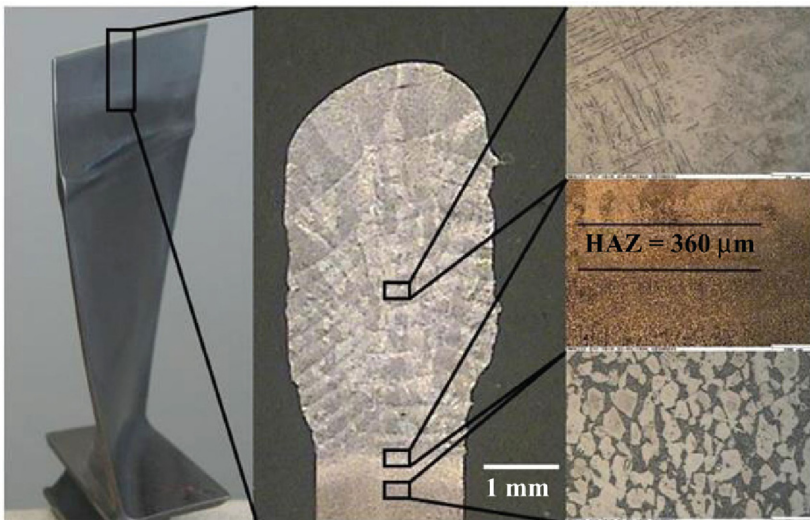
DMD repair of turbine components; left: repaired vane, middle: macro cross section, and right: microstructures (top to bottom shows the clad, interface, and base material). (Courtesy DM3D Technology.)
